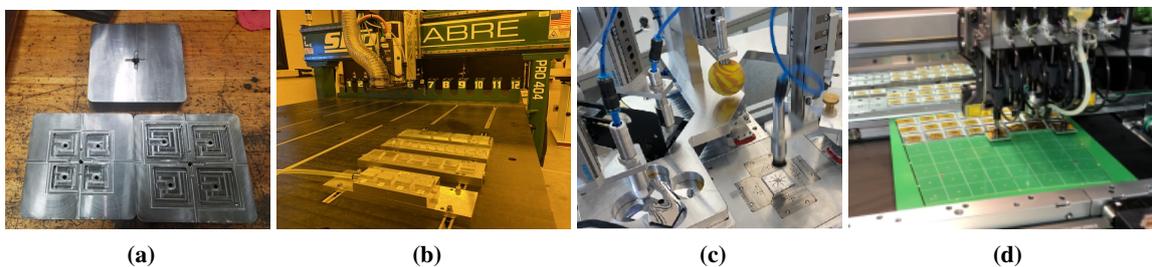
Four systems used in the production and assembly line. (a) shows the moulds used for the production of polystyrene-based injection-moulded scintillator tiles at FNAL [11]. (b) shows the machine at FNAL which will be used to cut the PVT-based tiles into shape [11]. (c) shows the tile wrapping station at DESY. (d) shows the pick-and-place machine used at DESY.
